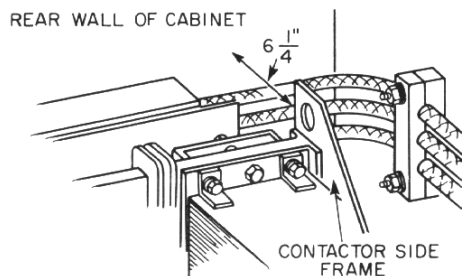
Critical Dimension for Full Engagement of Stab and Finger Assemblies
